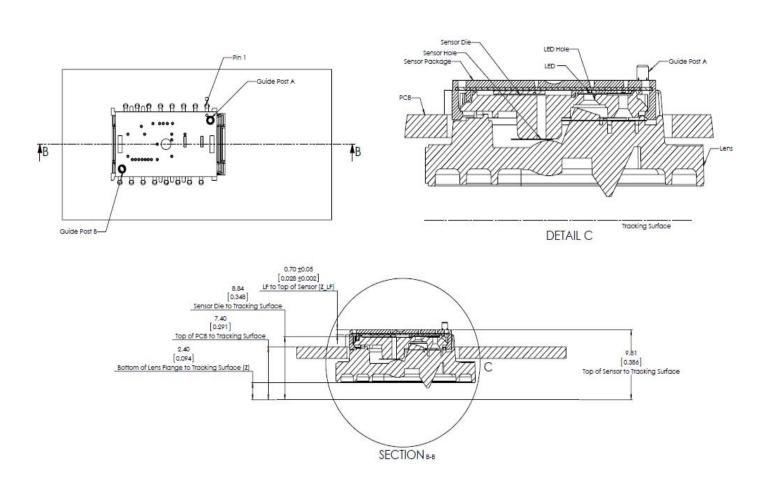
Assembly drawing of PMT9101 and distance from Lens reference plane to Tracking surface (Z)
